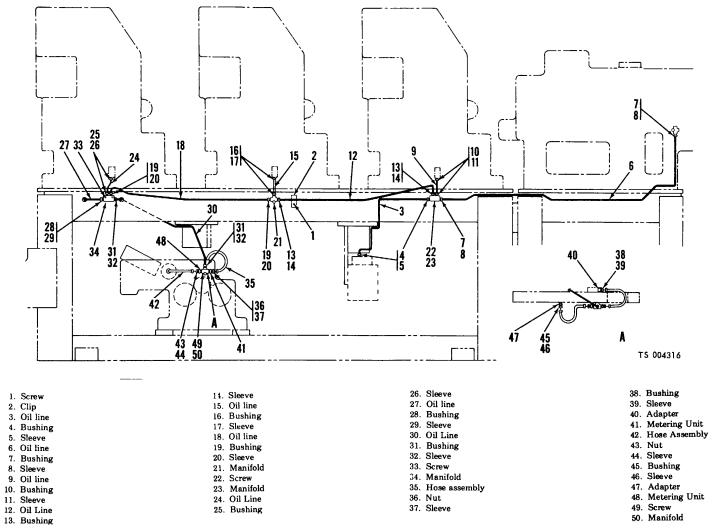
Operator side and feeder unit oil line assembly (sheet 1 of 2) 4-19
